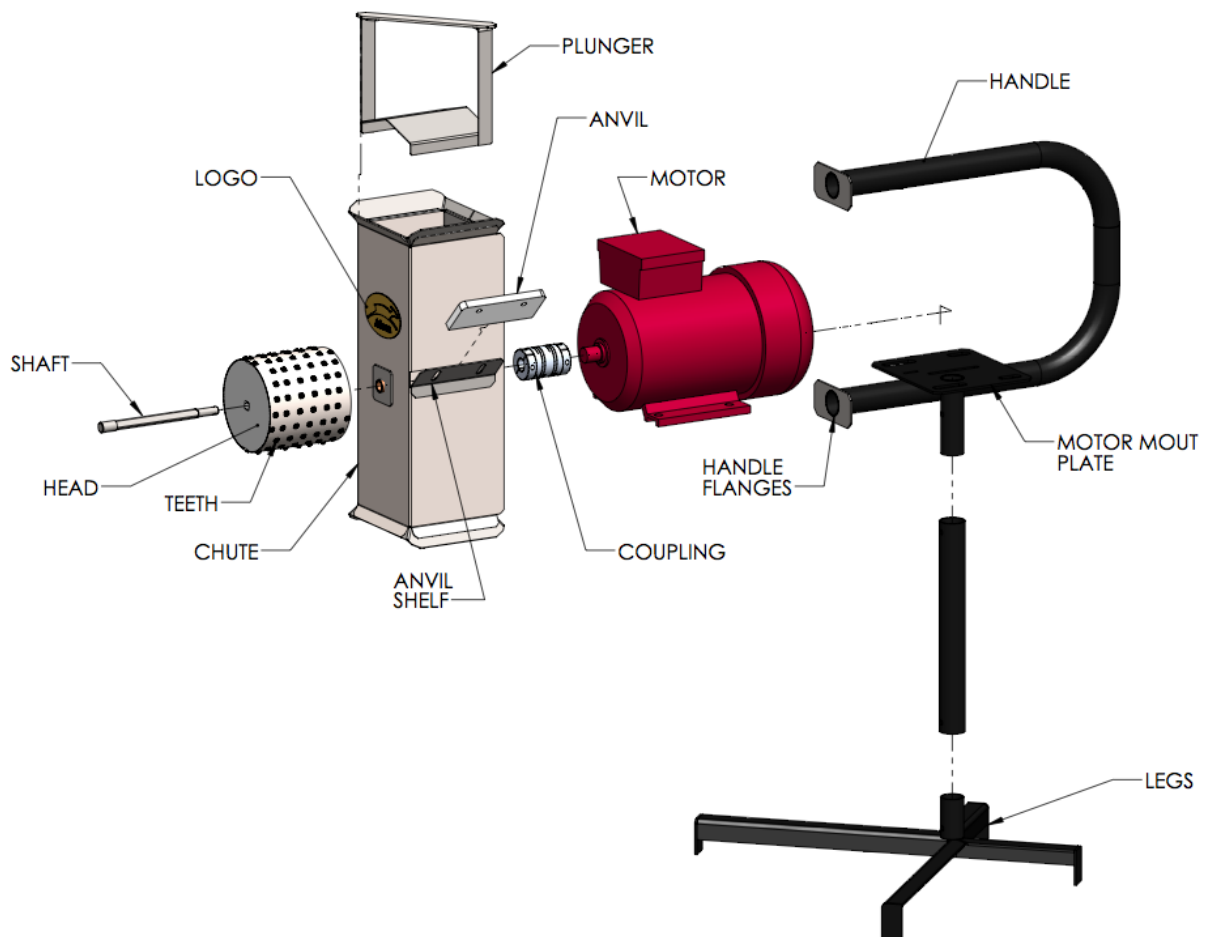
FIGURE: Exploded View of the Fall 2014 Production Prototype Grater
